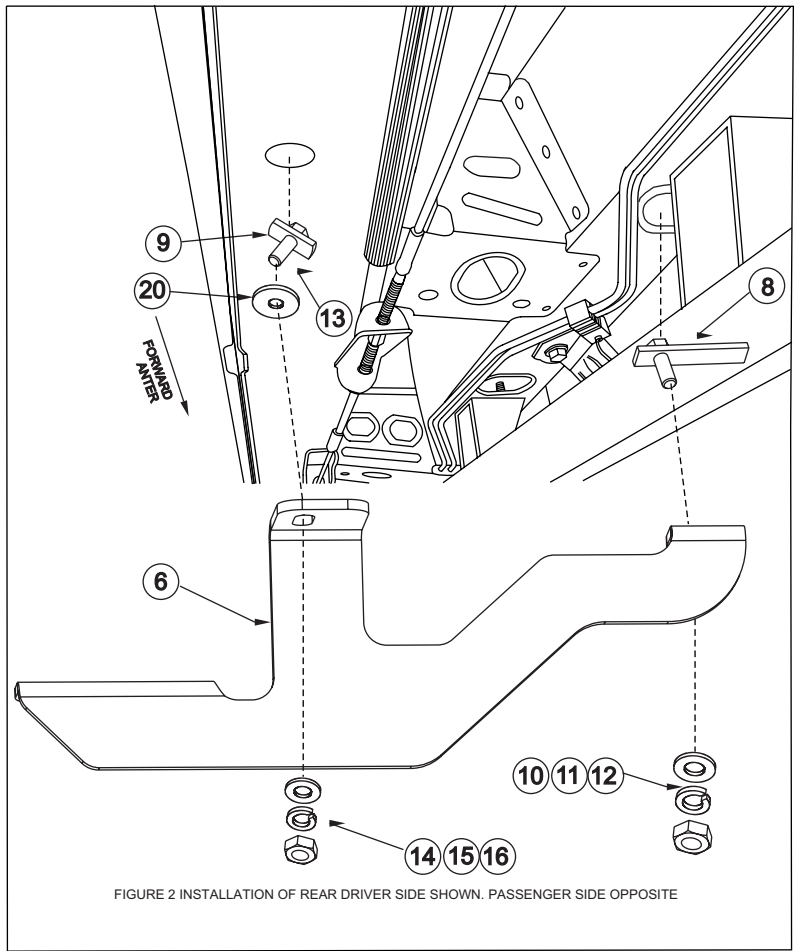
INSTALLATION OF REAR DRIVER SIDE SHOWN. PASSENGER SIDE OPPOSITE
